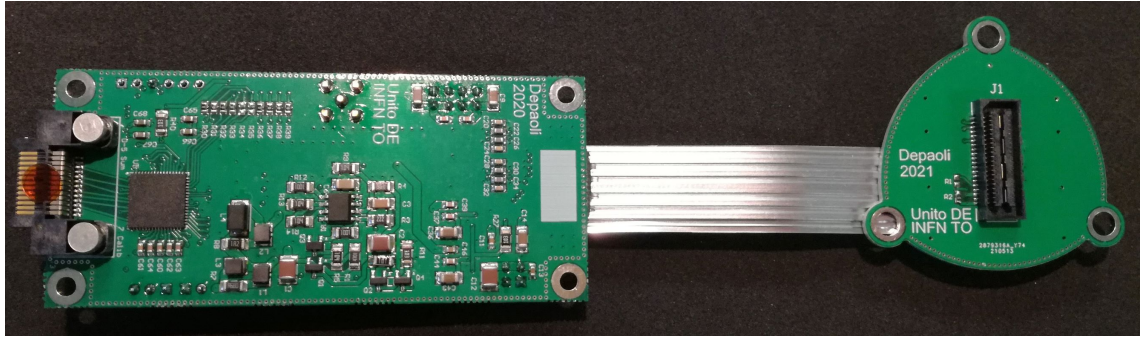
Pixel Main Board connected to the Slow Control Board Adapter PCB
